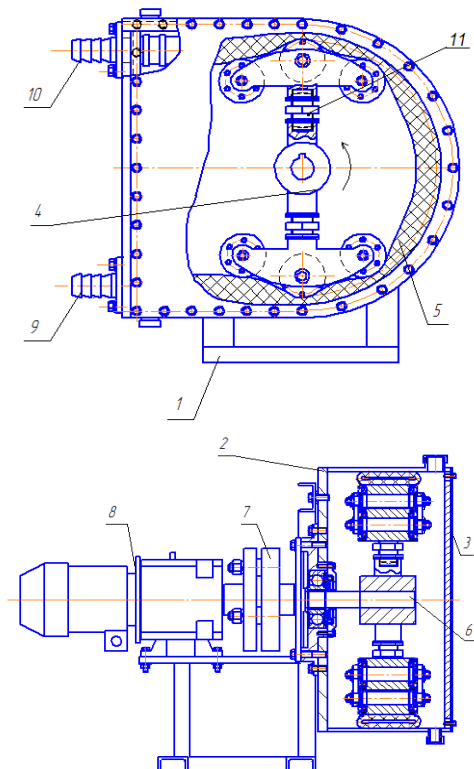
Universal non-piston hose concrete pump of a new design solution. 1 - frame; 2 - pump housing; 3 - the cover of the pump casing; 4 - rotor with rollers; 5 - a working part of a hose in the case of the pump; 6 - central rotor drive shaft; 7 - coupling; 8 - the electric motor; 9 - the suction hose connection; 10 - the union of a delivery part of a hose; 11 - threaded device.
